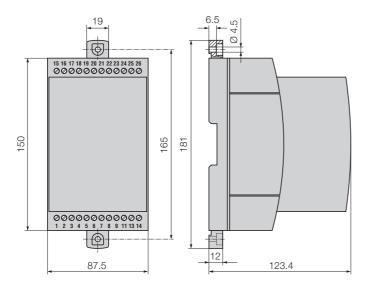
SINEAX DME 406 in housing T24, screw hole mounting brackets pulled out.
